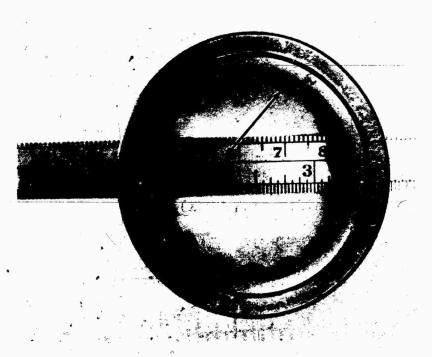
Roller Bearing End Wear (P/N 114DS265-1).
